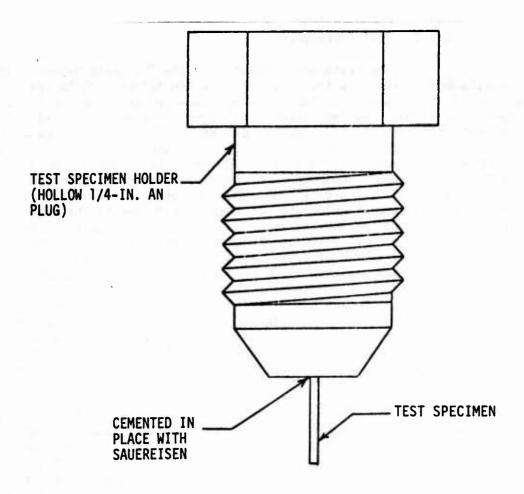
Schematic of Test Specimen Holder with Test Specimen in Place
